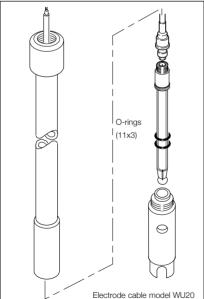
Mounting a cable and sensor in a 1-hole fitting
